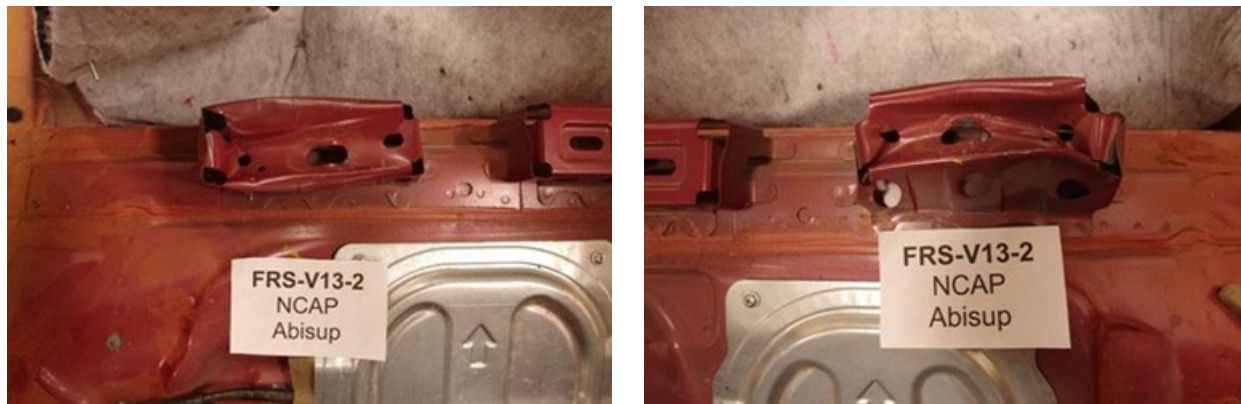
Damage to Seat Bottom Supports From Test V13-2 (Left and Right Outboard)
